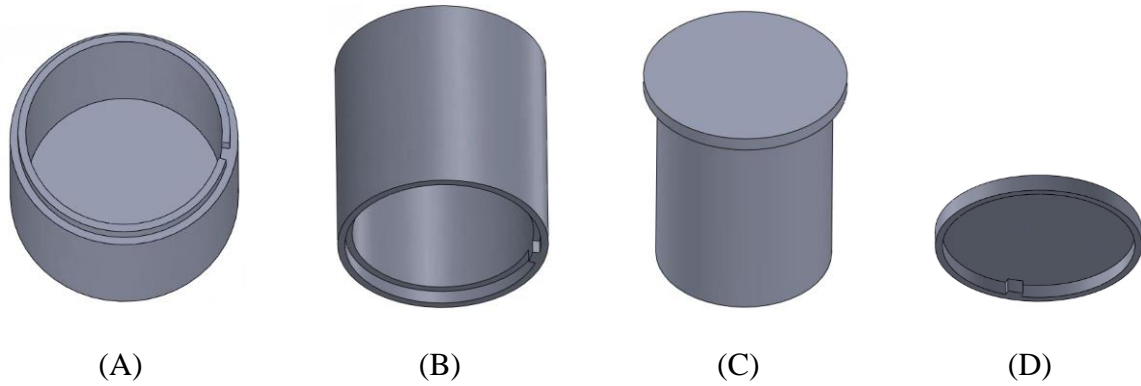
Main housing (A); Reusable extension (B); Reusable plunger (C); Main housing cap (D).
